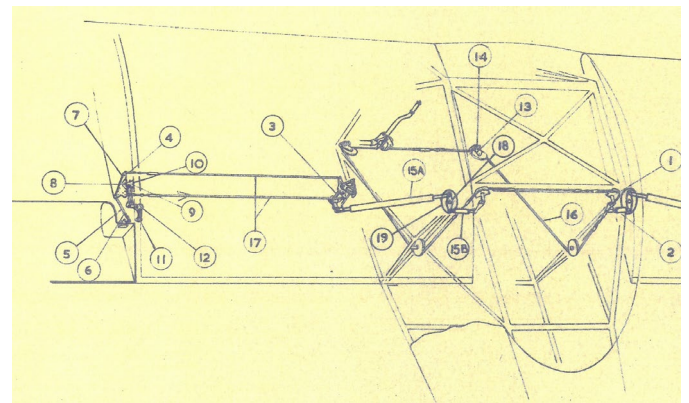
The drawing above shows the port side aileron operating circuit (the view is from above and slightly behind the wing): the operating rod to be checked is item 5 in the drawing with the Chobert rivets listed as item 6.
